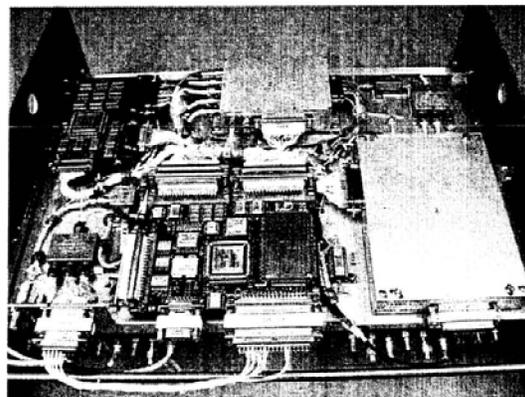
R2 2nd IF/LO Assembly — DC side.
